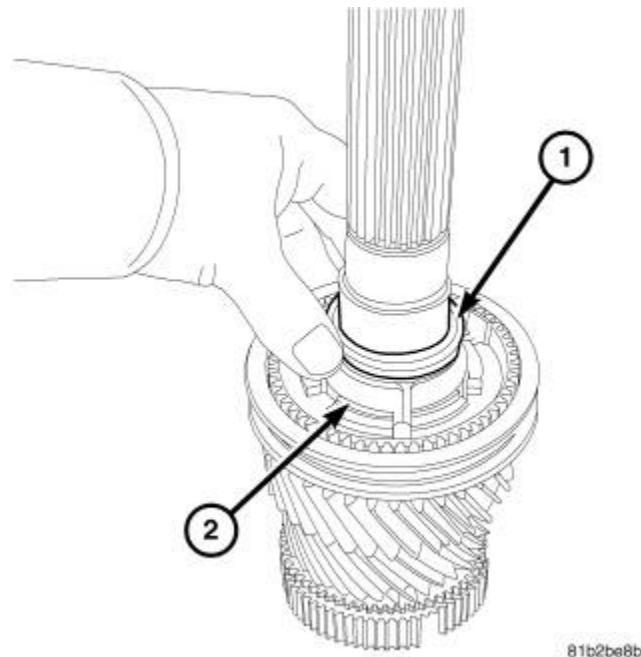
1-2 Synchronizer Hub Split Ring Retainer & Split Rings
